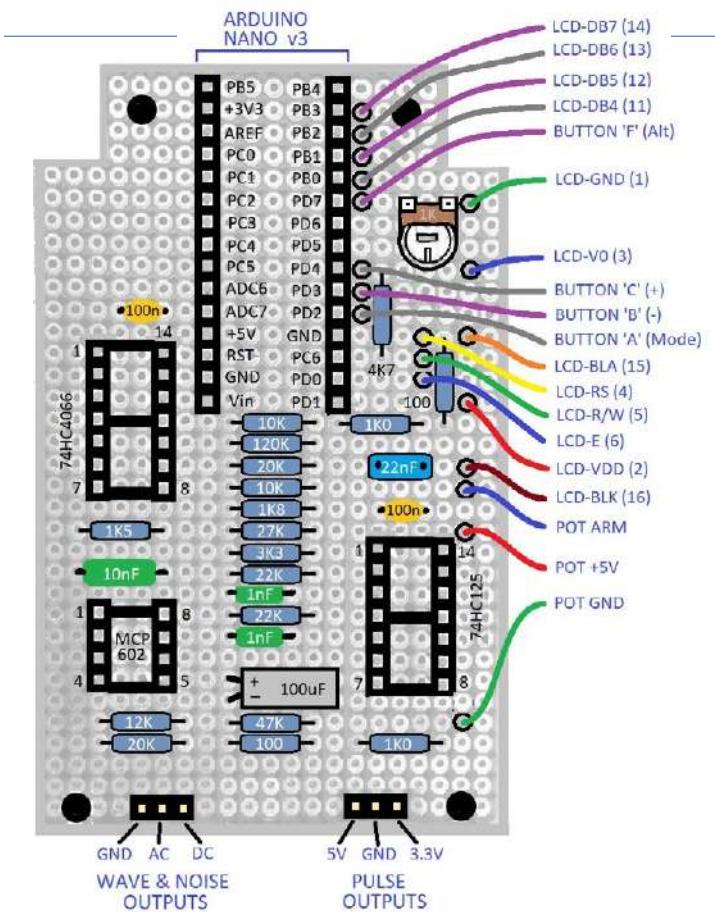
Top side of the prototype board with the exact position of the components and sockets.
